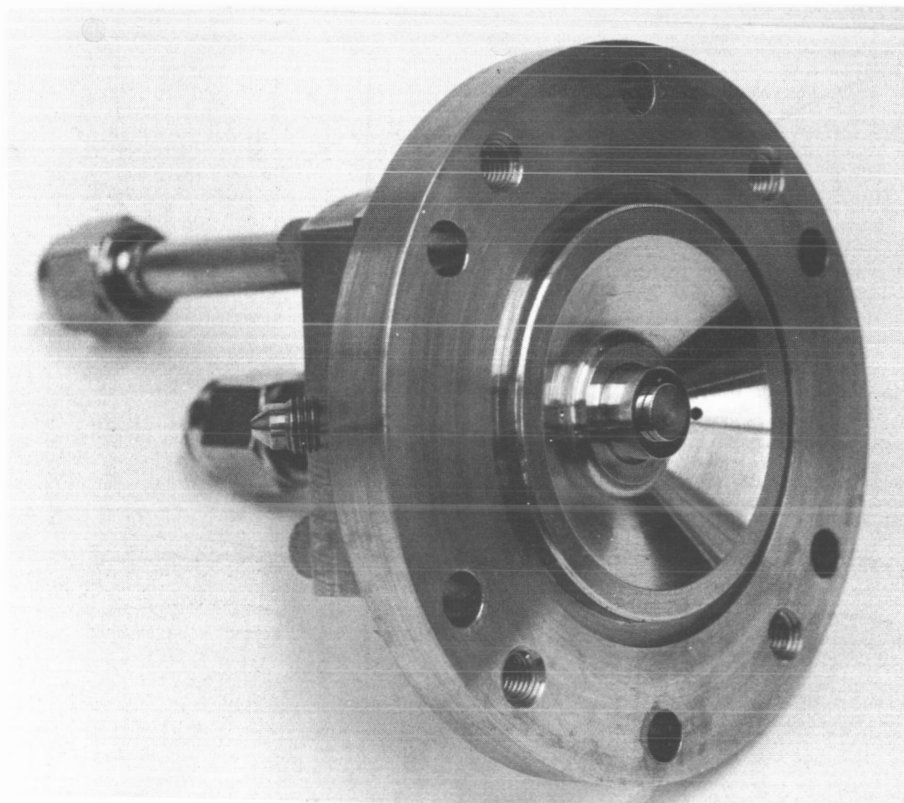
Assembled 100 lbf FLOX/LPG Injector
